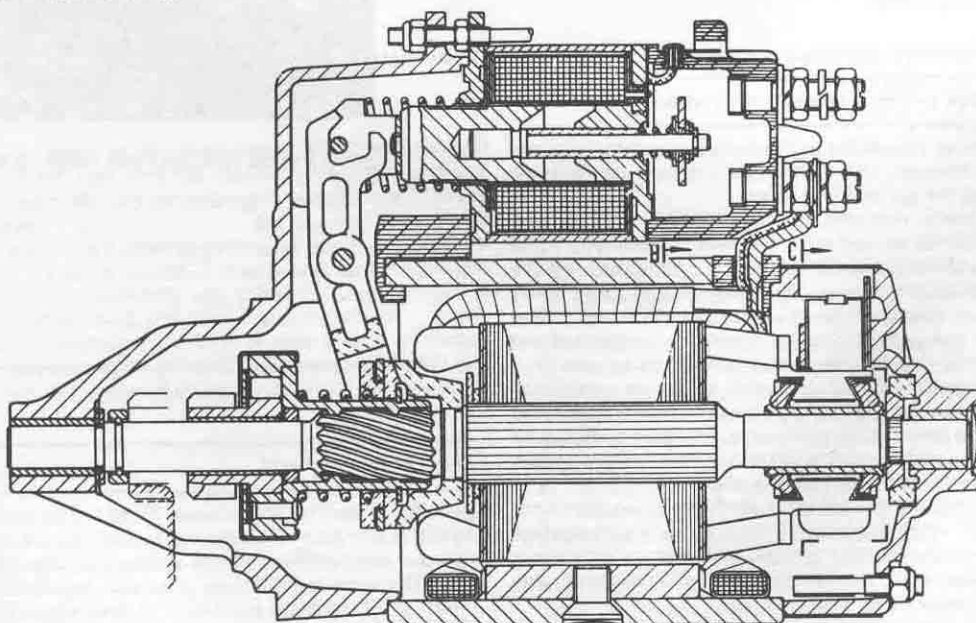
Longitudinal section of the starter motor (Sec 13)
